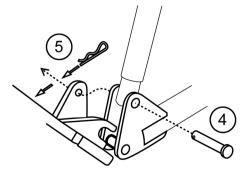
Attaching the edge grinder adapter, steps 4 - 5
